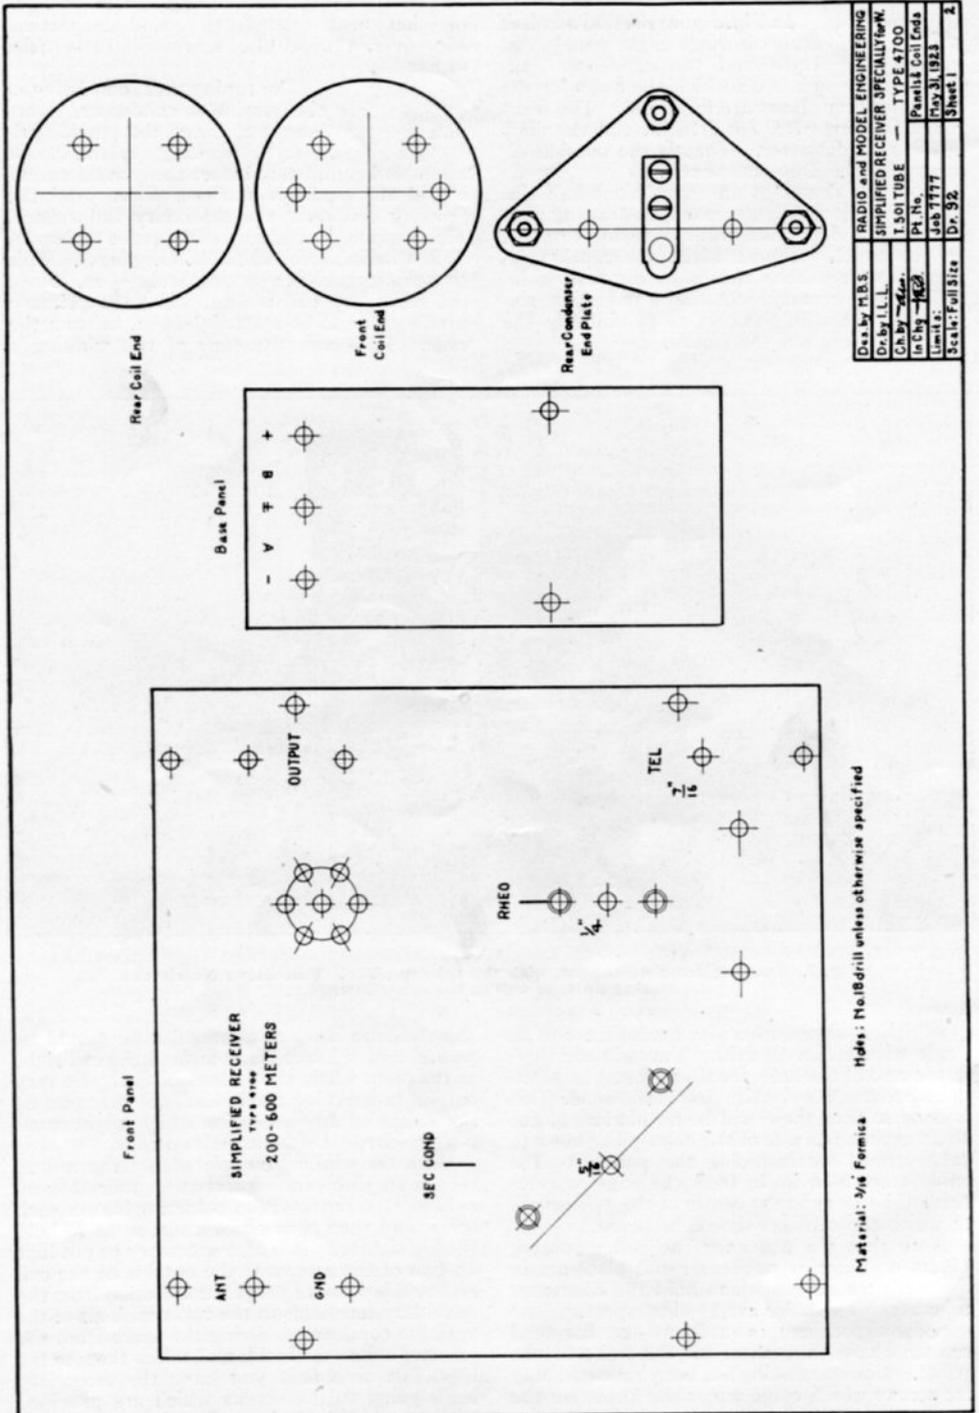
One-half scale drawing of the front and base panels and the coil ends. The view of the condenser and plate indicates the position of the holes for the coil mounting pillars
